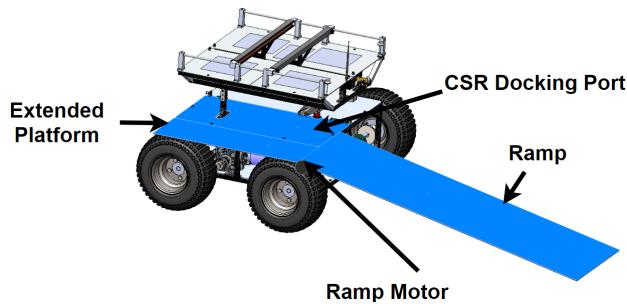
On-Board Ramp with Extended Side Platform Docking Mechanism.
